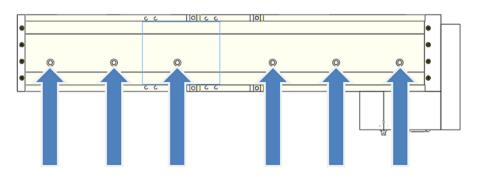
Position of the Ø 6.6 mm mounting holes in the base body of the stage (protective cover removed, sled slightly indicated)
